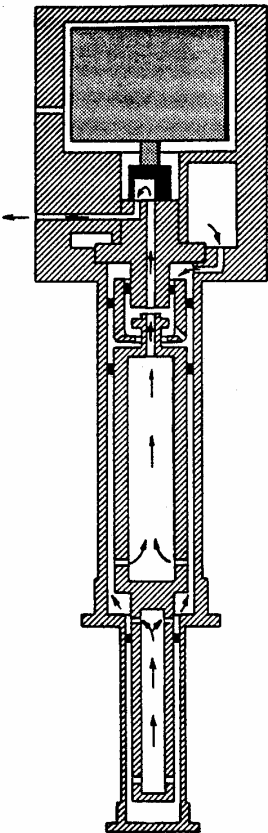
Cold Head Exhaust, Valve Open, Displacer Up
